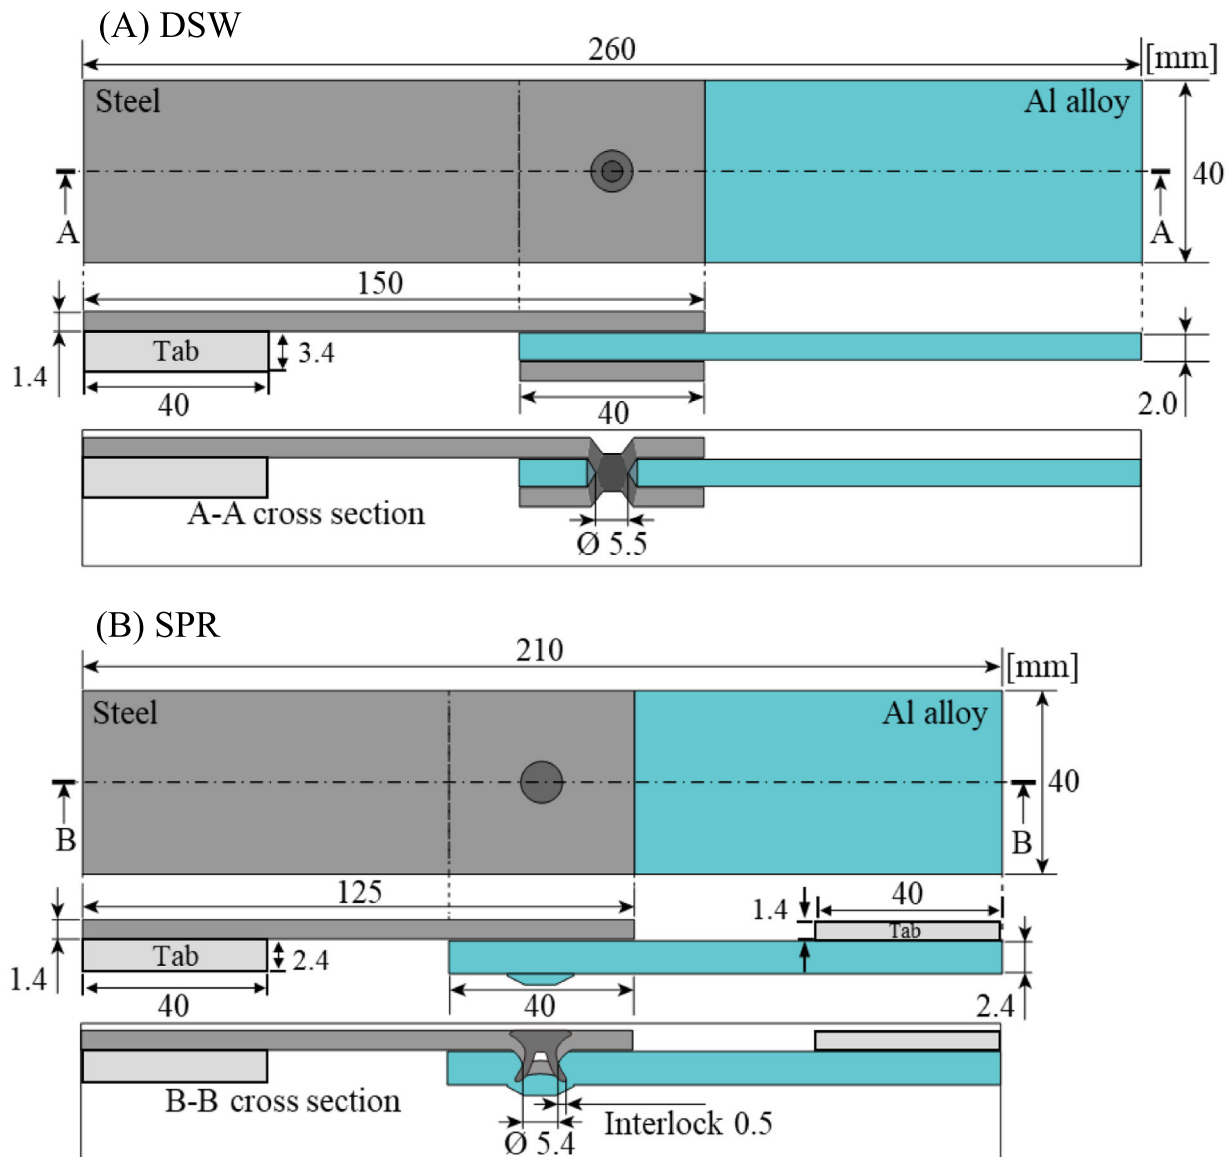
Geometries of the dissimilar joint specimens used in this study. (A) DSW and (B) SPR specimens. DSW, dimple spot welding; SPR, self-piercing riveting. [Colour figure can be viewed at [wileyonlinelibrary.com](https://onlinelibrary.wiley.com/doi/10.1111/ffe.14227)]
